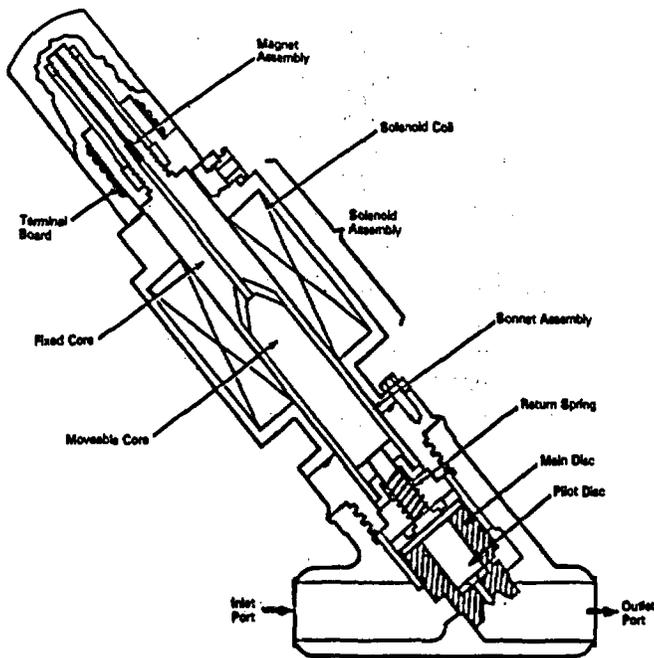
Schematic drawing of a Target Rock pilot-assisted solenoid-operated valve
